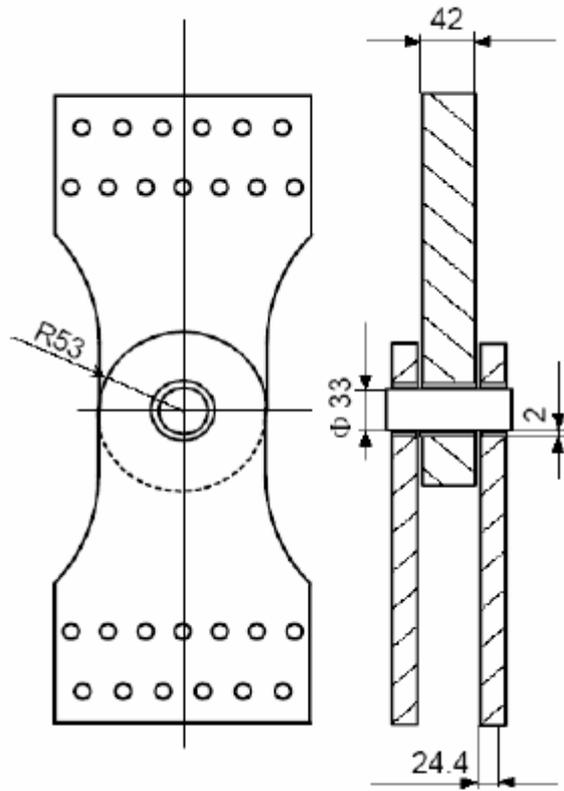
Geometry of the specimen simulating the M346 wing-to-fuselage attachment.
